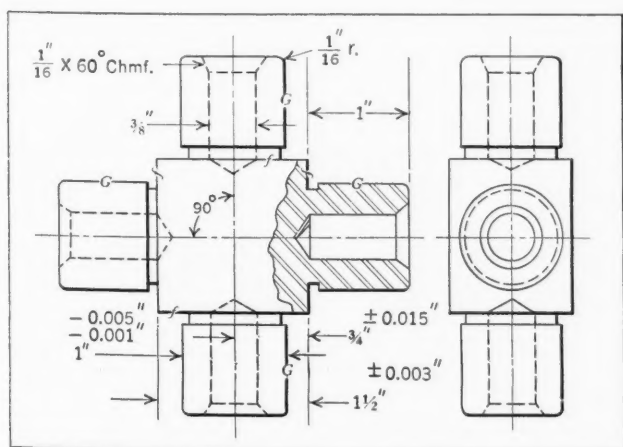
Cross Machined with Tool Equipment Shown in the Heading Illustration and in Fig. 3
